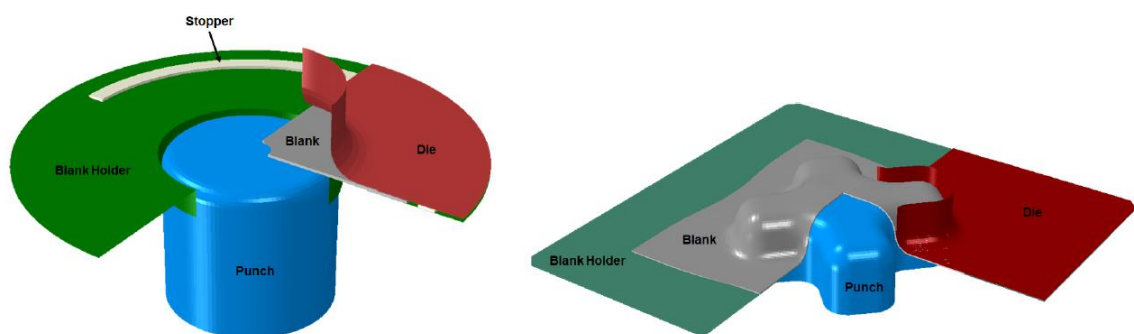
Finite element 3D models: Swift test (a); Cross die forming.
